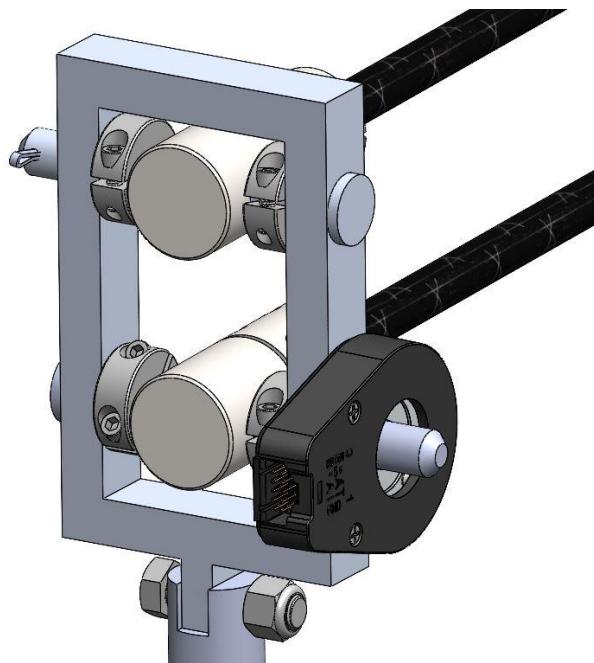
Full gimbal assembly with boom and sleeves fitted in.
